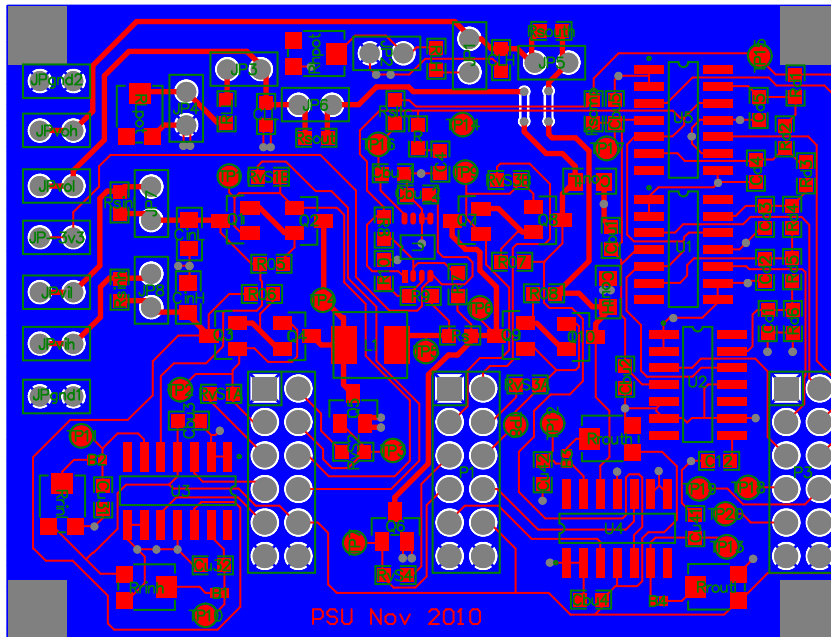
PCB layout with top layer, bottom layer, and component overlay drawing
